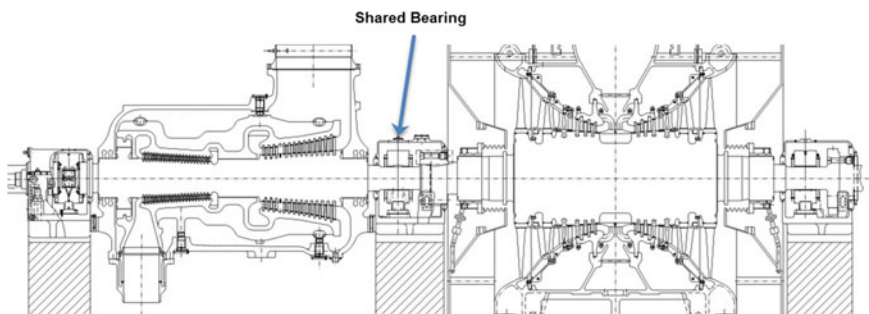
Shared bearing rotor system (Courtesy of Siemens)
